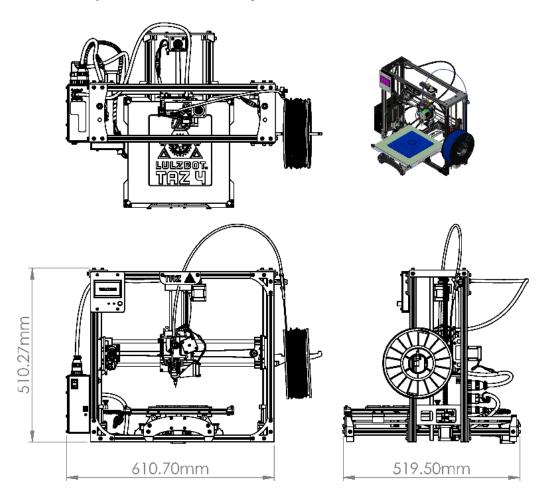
A model of the full 3D printer assembly with significant dimensions labeled
